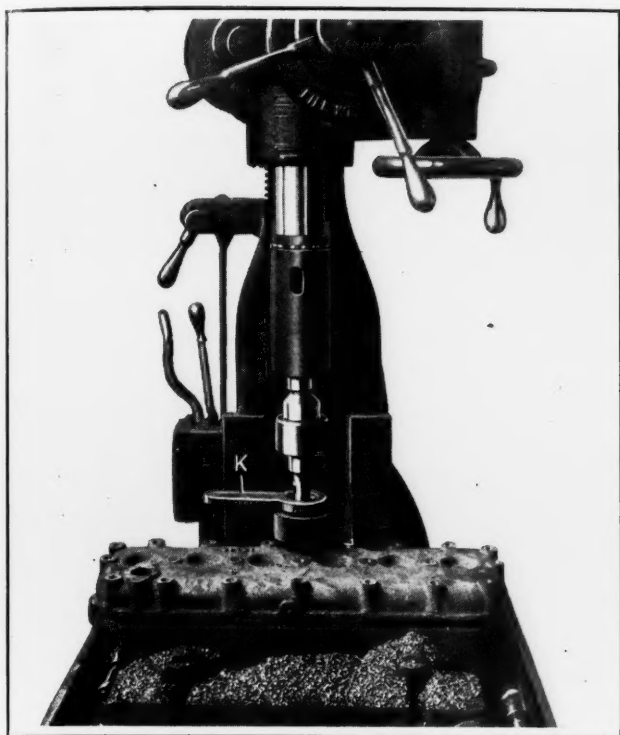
Simple Set-up employed in drilling and reaming the Distributor Hole
